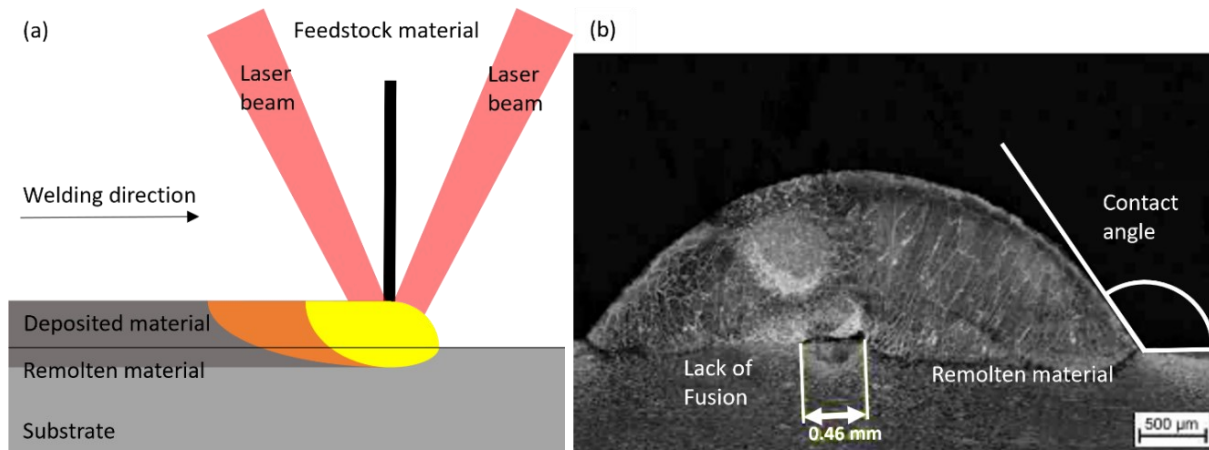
(a) Schematic of the coaxial L-DED-wire process and (b) cross-section of a weld bead produced with laser directed energy deposition with wire [74].
